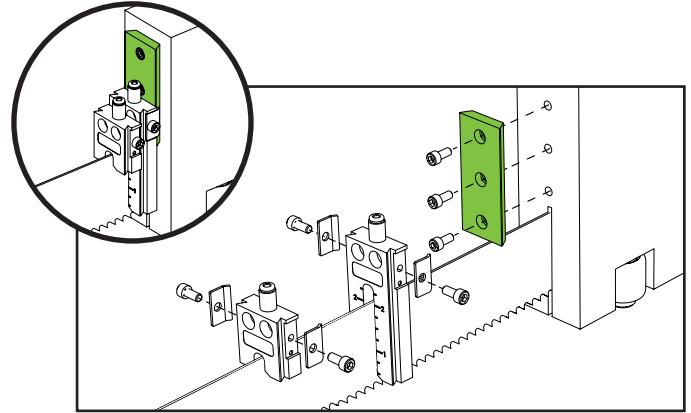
Mounting the Band Saw Blade Nozzle and Band Saw Guide Nozzle to the guide block using rail mount option
